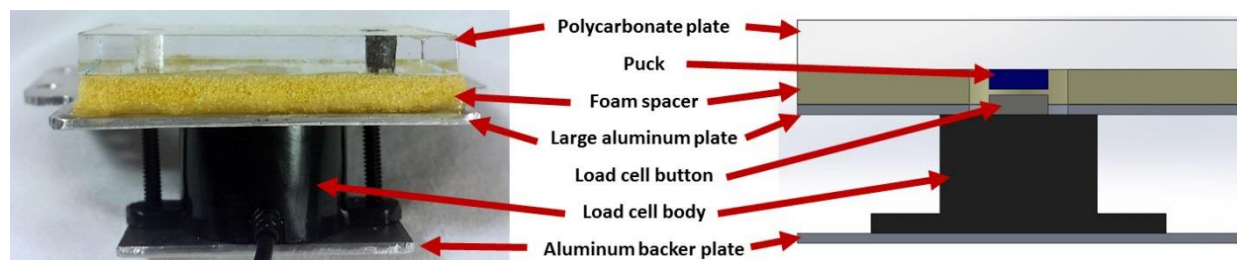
Load cell housing assembly in profile to show the individual components. The left image shows the actual assembly with puck and load cell button hidden. The right images shows a computer-aided drafting model of the assembly with cross-sectional cut to show the puck and load cell button.
